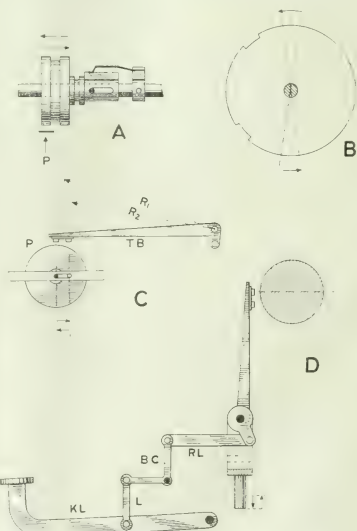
Inversion devices for type-wheel and type-bar printing mechanisms.
